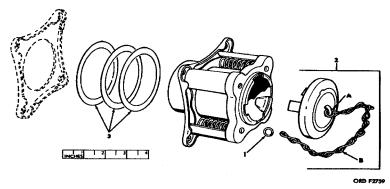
Pyrotechnic pistol mount M1--exploded view.
